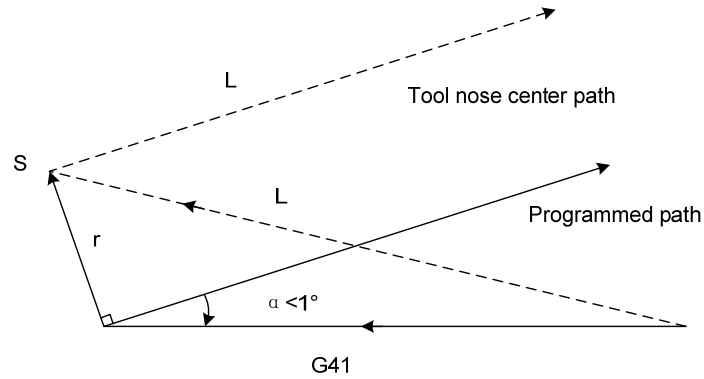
Linear—linear ($\alpha < 1^\circ$, start-up tool outside)
